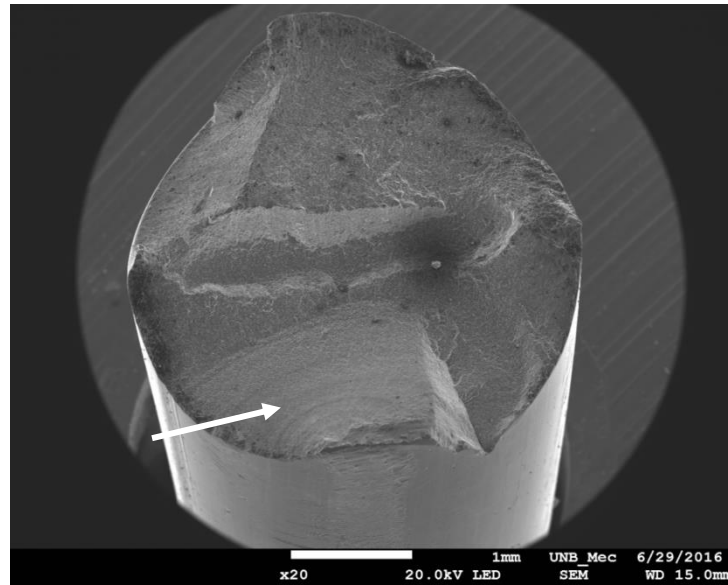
Fracture surface of AAAC 900 MCM wire (arrow indicating the quasi-planar area)
